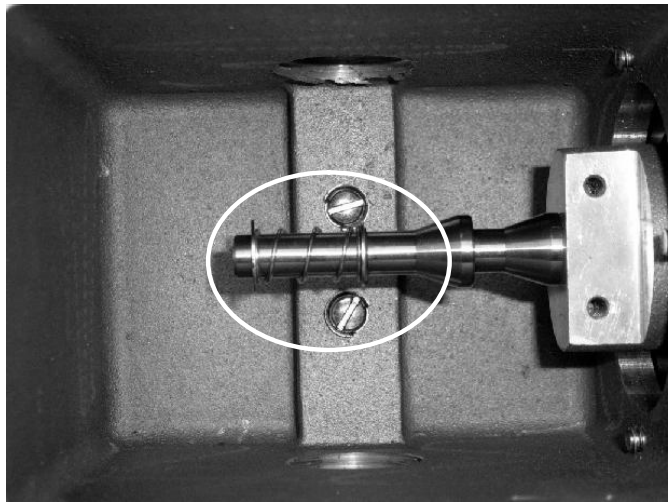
Use hand to hold spring retainer while removing screws. Do not remove shaft spring and washers.
